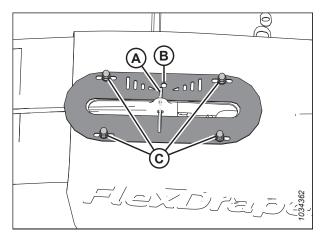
Wing Movement Indicator on Top of Flex Linkage Cover – Left Side Shown
